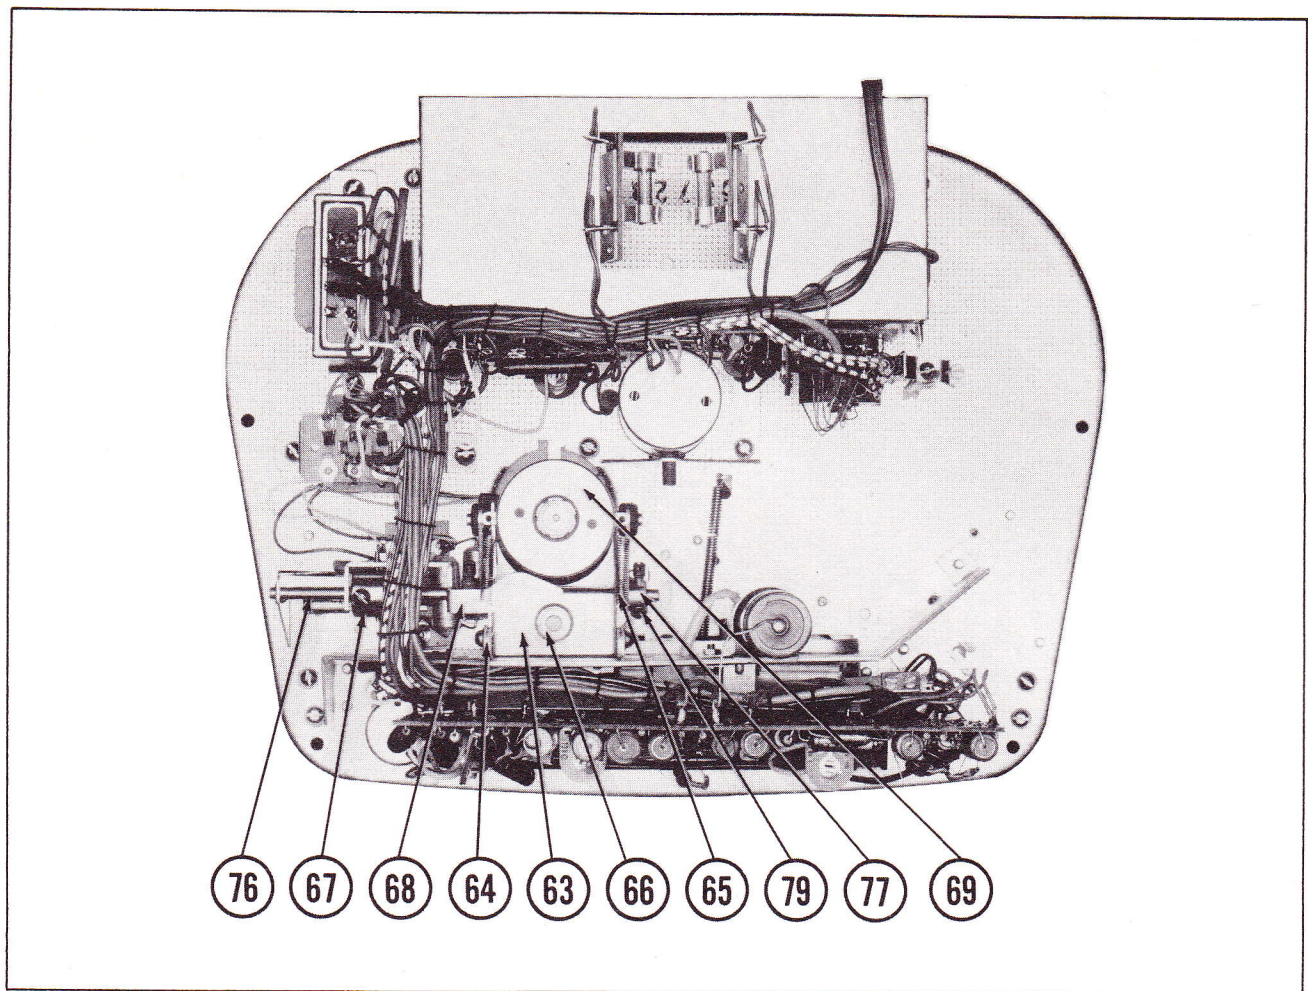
BOTTOM VIEW OF MECHANISM WITH FLYWHEEL REMOVED.
